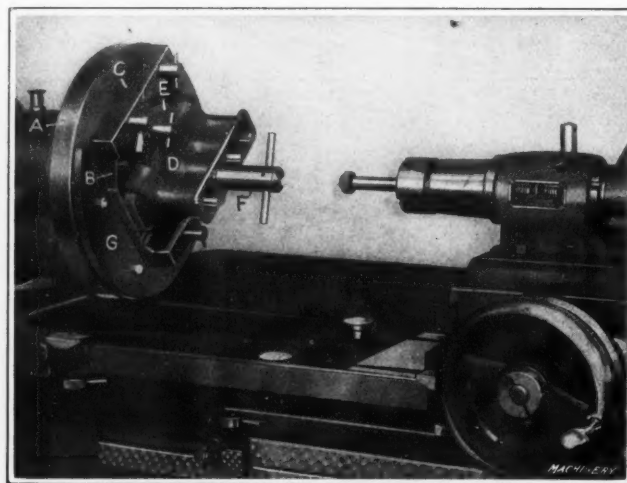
Fixture for holding a Four-hole Air Pump Cylinder
